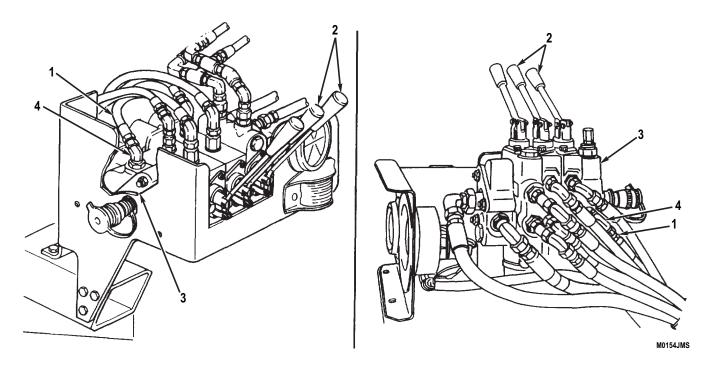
Hydraulic Pump Outlet-to-Hydraulic Control Valve Inlet Hose Disconnection.
